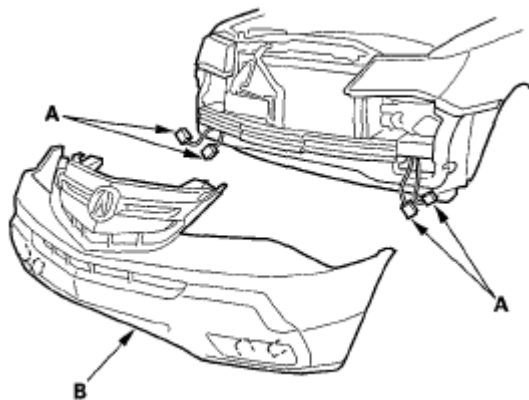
Identifying Front Fog Light Connectors And Front Bumper
